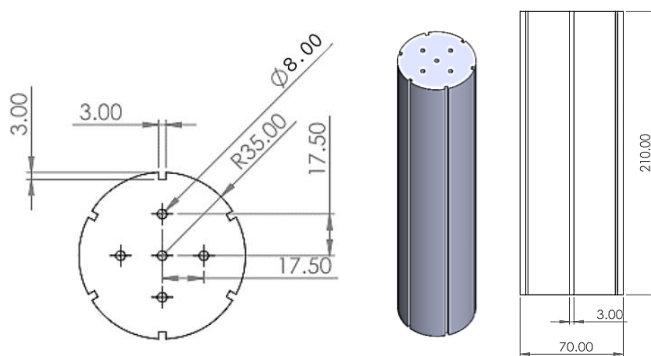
Diagram of the Cylinder Cutaway (All Dimensions in mm).
